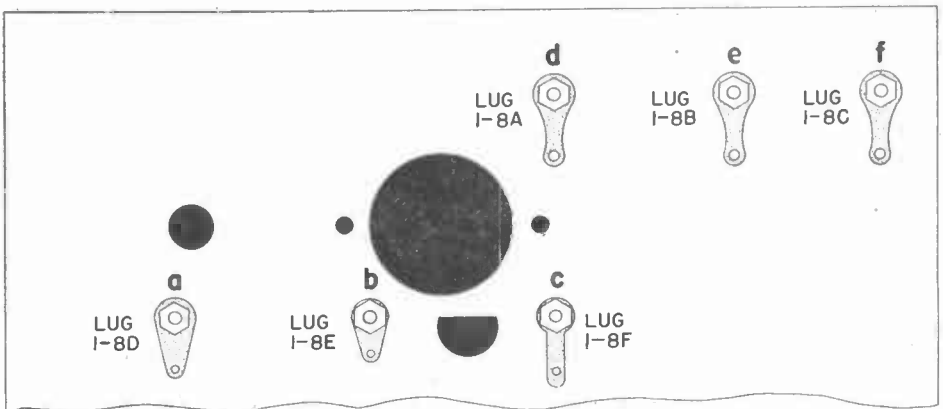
Upon completion of Experiment 5, you should have six soldering lugs, all tinned, mounted on the chassis exactly as shown here, and with the ends of the lugs bent upward as shown in Fig. 23. Note that the letters in the part numbers identifying the various lugs do not correspond to the letters identifying the chassis holes in which the lugs have been mounted.
